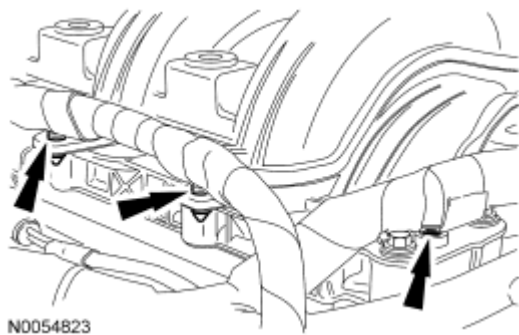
Locating Wiring Harness Retainers From Upper Intake Manifold
